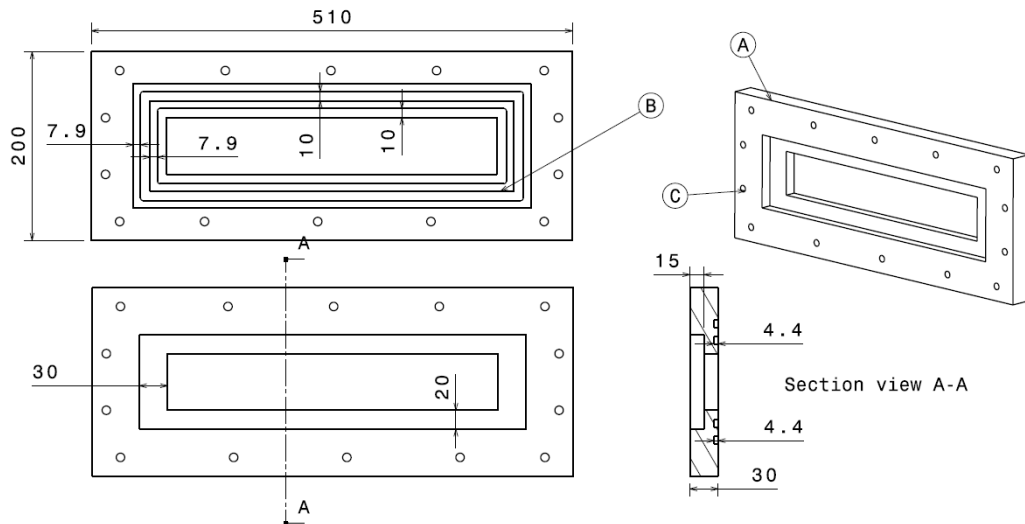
Flange dimensions. A: The flange; B: O-ring grooves; C: Holes for bolts (dimensions in mm)
